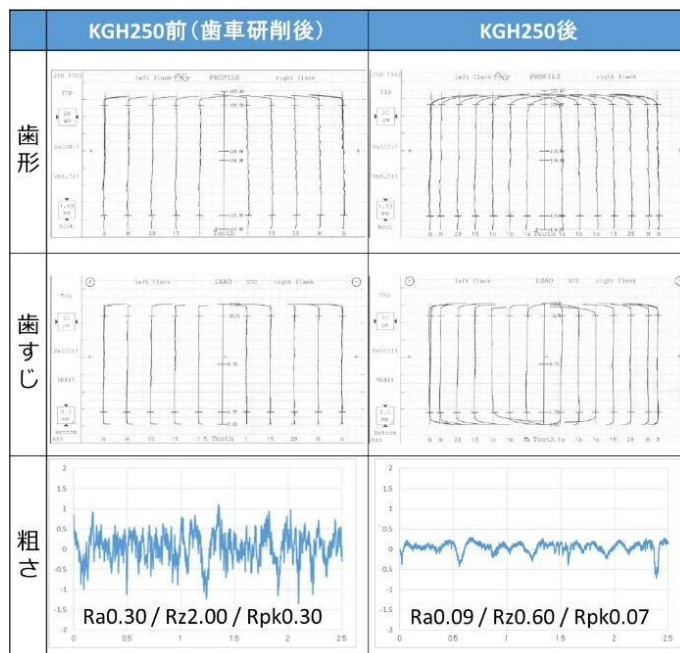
Example comparing gear accuracy and tooth surface roughness after gear grinding and subsequent machining with the KGH250.
